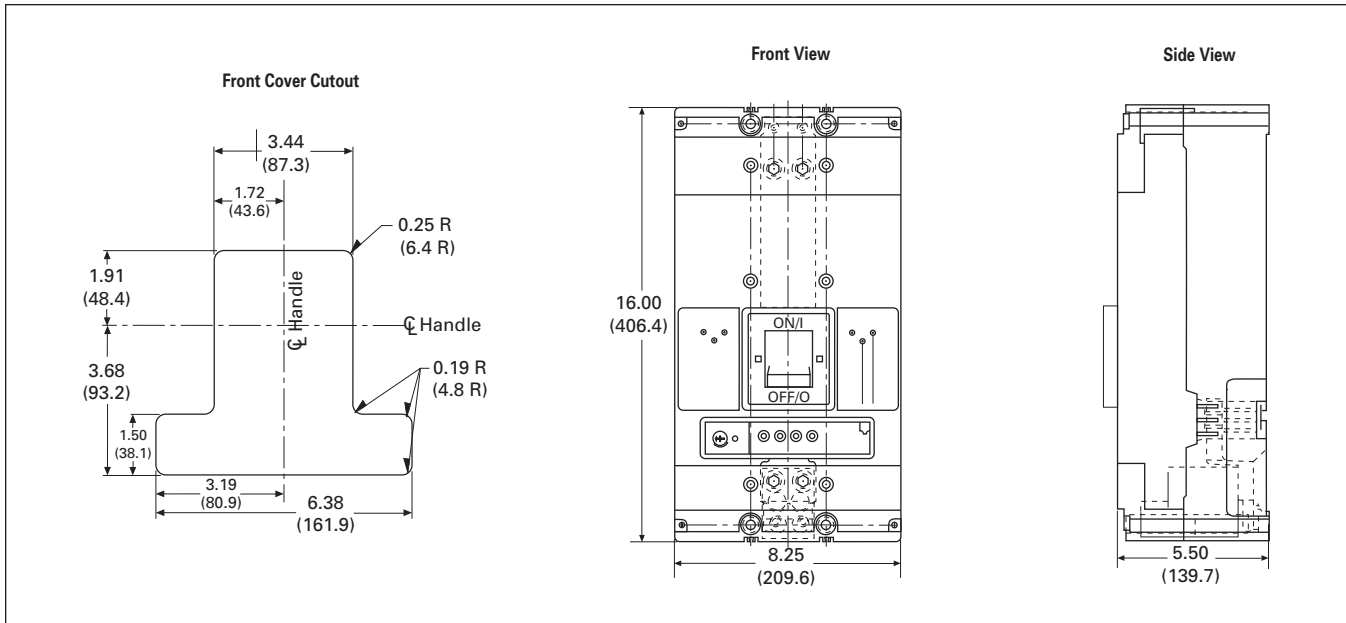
LD-Frame, 2- and 3-Pole — Dimensions in Inches (mm)
